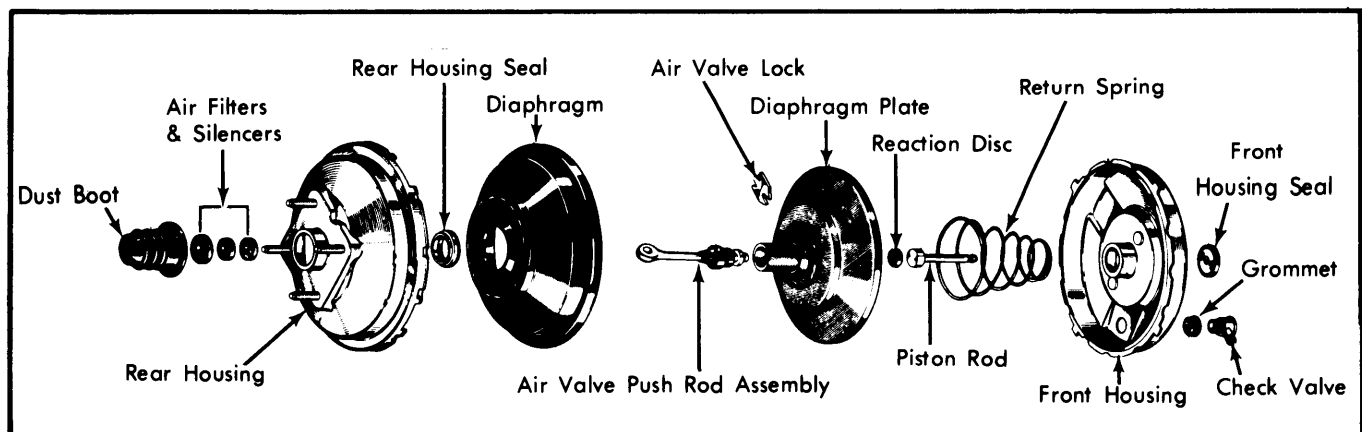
Exploded View of Bendix Single Diaphragm Assembly
